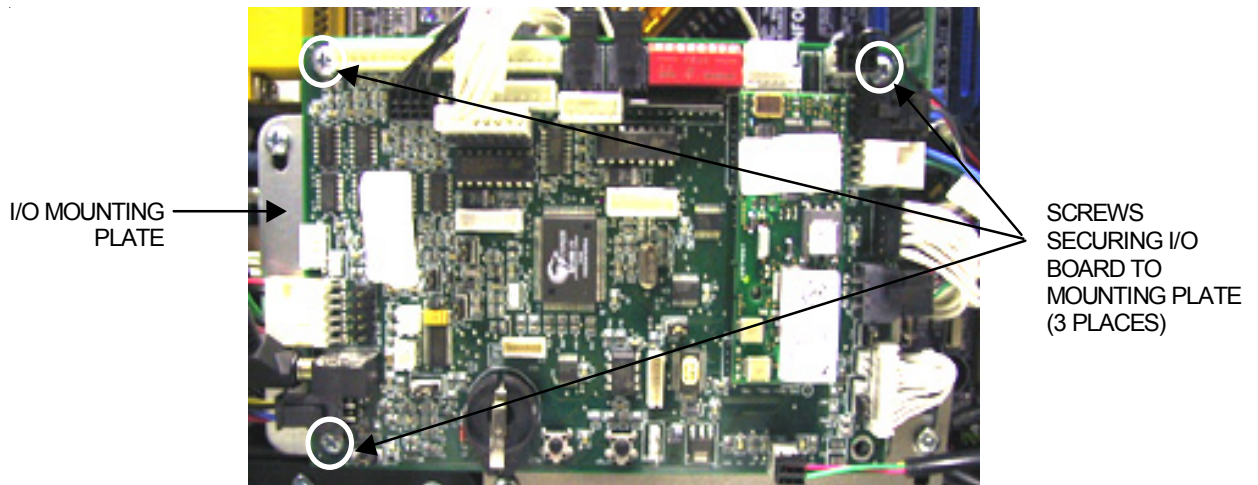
I/O BOARD AND MOUNTING PLATE
